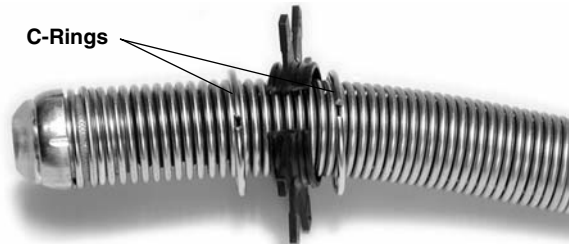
Guide and C-Rings Positioned On Spring Assembly.
